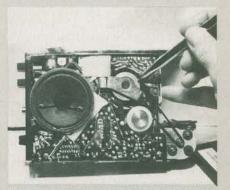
FAST-FORWARD problems may be caused by oil on the idler pulley or capstan/
